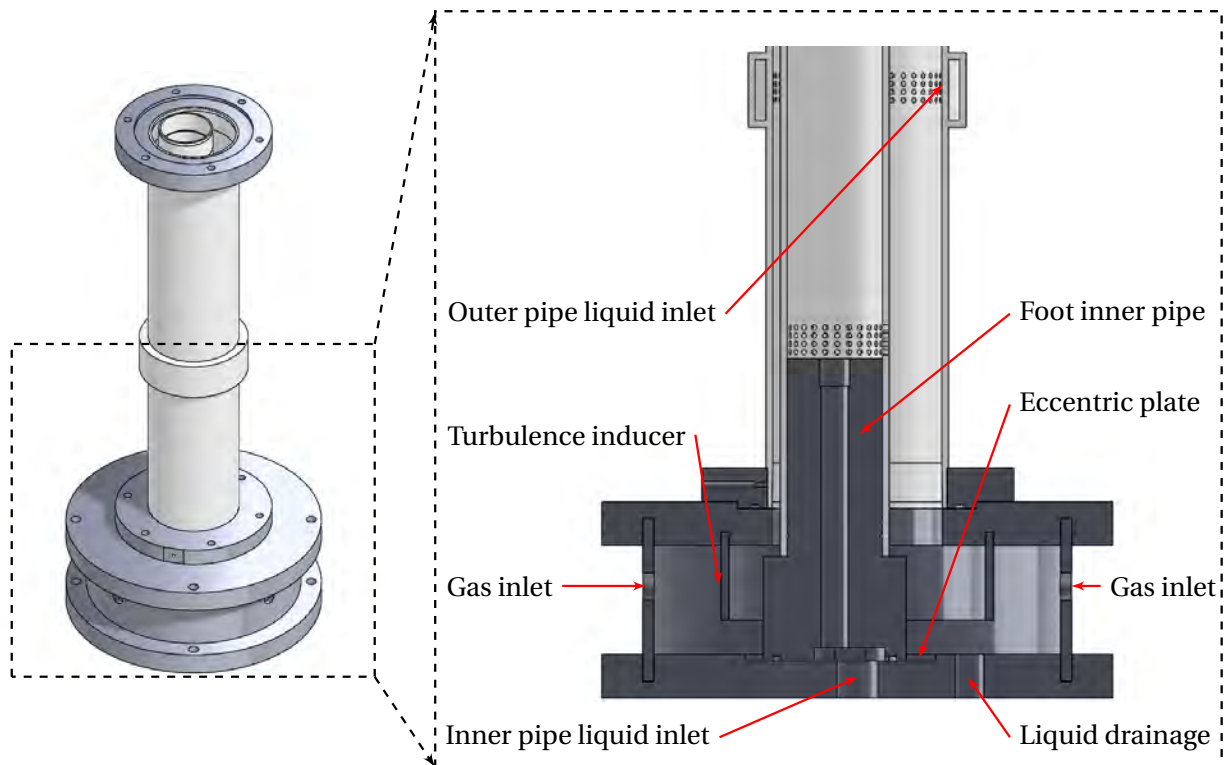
Inlet design at an eccentricity of 0.9. Left, exploded view of the inlet section. Right, the cross-sectional side view of the inlet.
